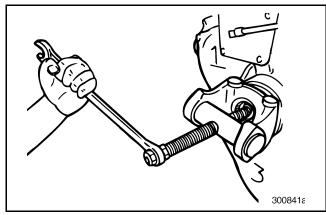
Removing Drive Yoke (T313L/T318L Shown)
